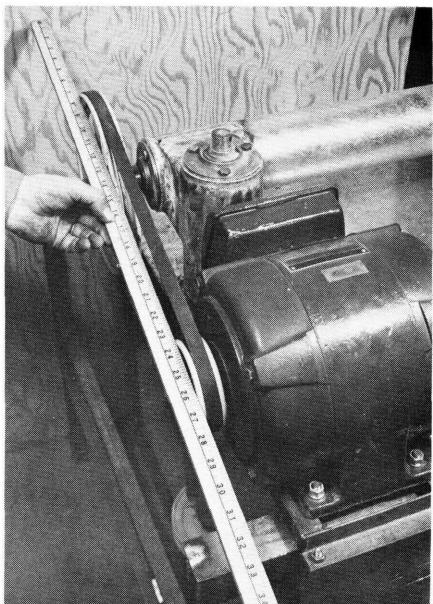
Align the motor and load pulleys so that the belt is perpendicular to each shaft.
